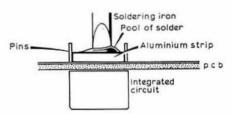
G5YH's technique for desoldering dual in-line integrated circuits
